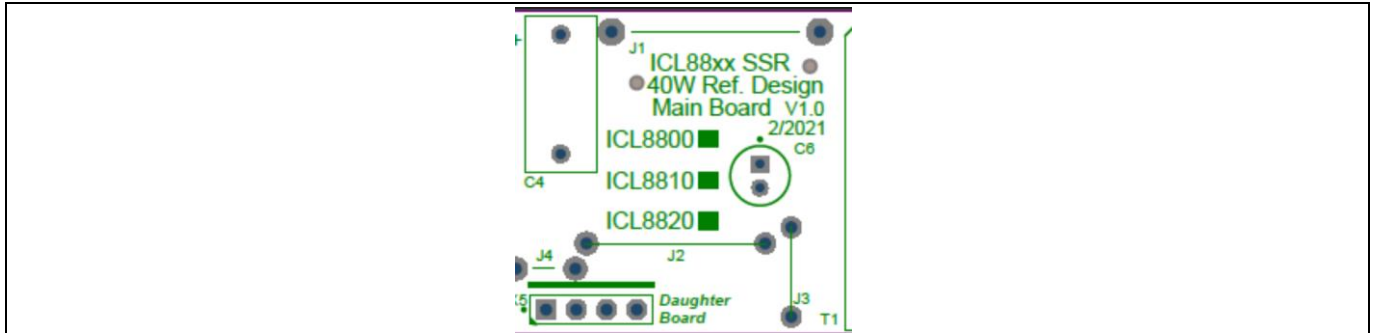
The soldered-in IC is marked on the powerboard’s top side
